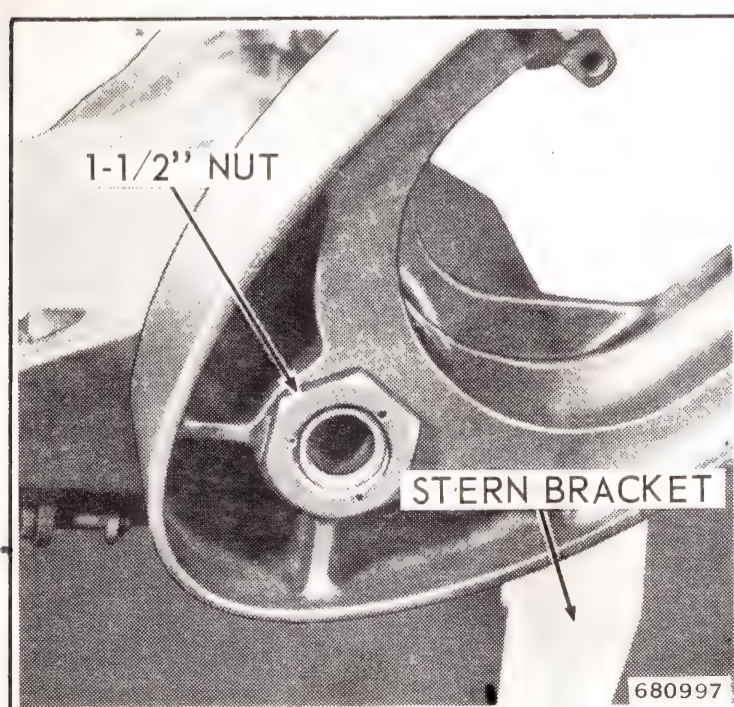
Pivot Shaft and Stern Bracket Assembly
